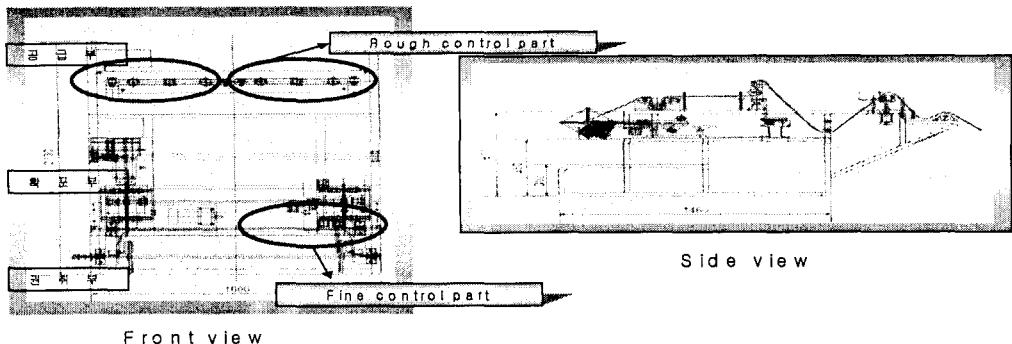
Design of Automatic Velvet Take-up Machine (좌)
